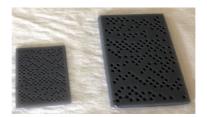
Tags with bump (left) and dimple (right) patterns printed using SLA method.
